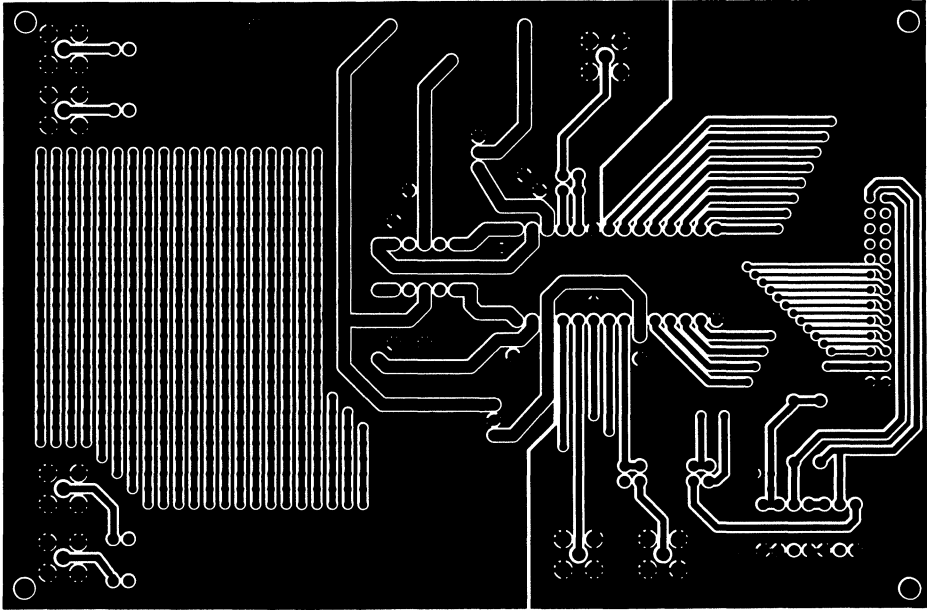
PCB Solder Side Layout for the Circuit of Figure 20
